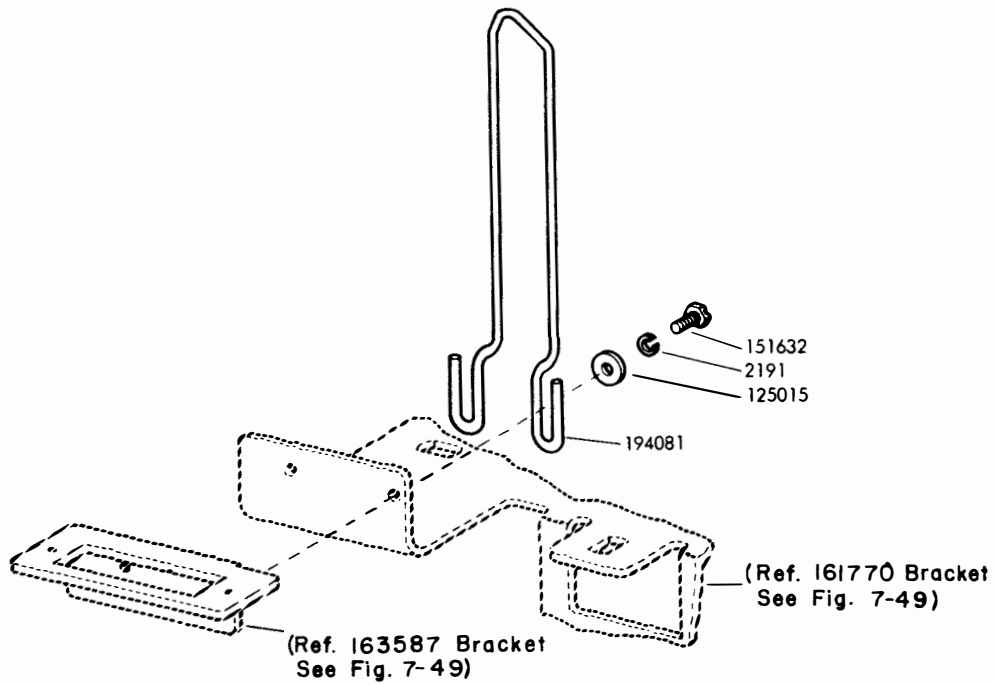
Tape Guide Mounting Components for Auxiliary Base - Used on Low-Level Sets
